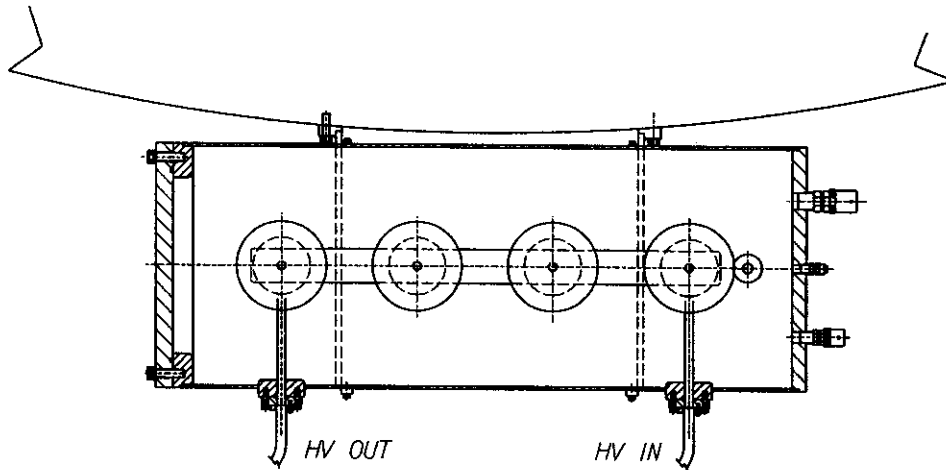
Drawing of the air tank housing the resistor string (top view). The 3 resistors, not shown, are supported by 4 standoff insulators. The coaxial cables from the power supply and the deflector enter through O-ring sealed flanges on the side of the tank. The outside dimensions are 10.75" diameter and 28.5" long.
